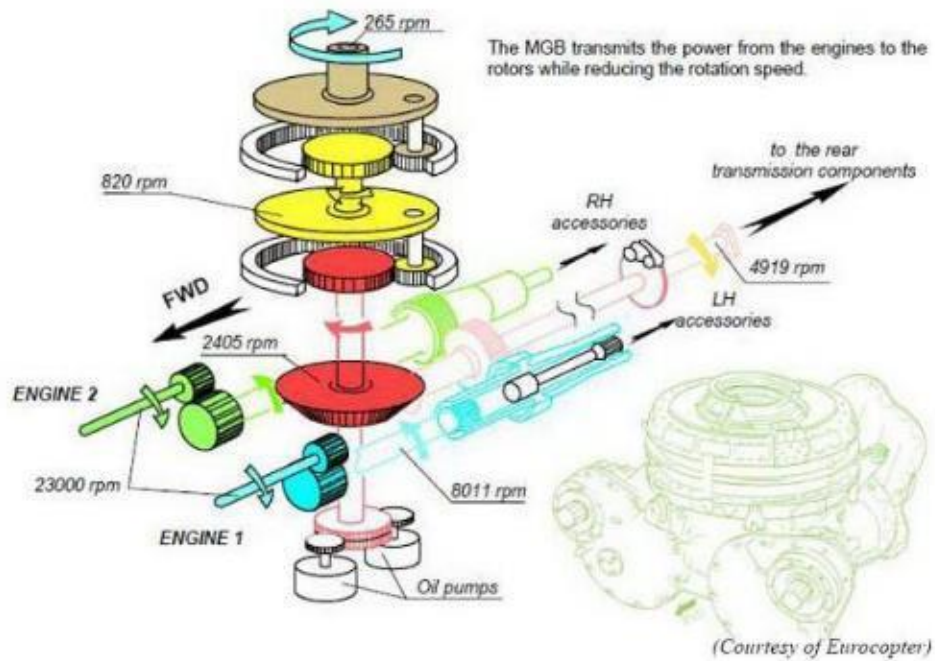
Main Rotor Gearbox dynamic components. Source: Airbus Helicopters
